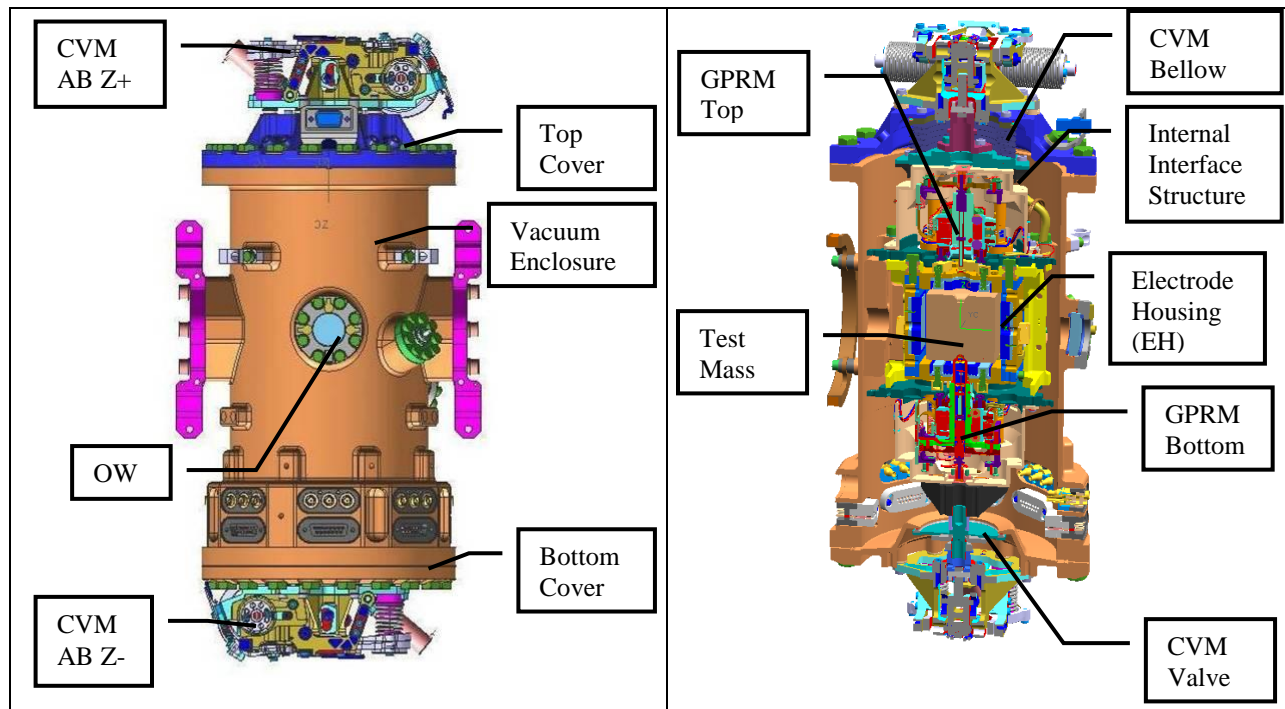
LISA Inertial Sensor Head: assembly (left) and section (right) – in the tested QM the Electrode Housing EH was a dummy only partially representative of the flight configuration
